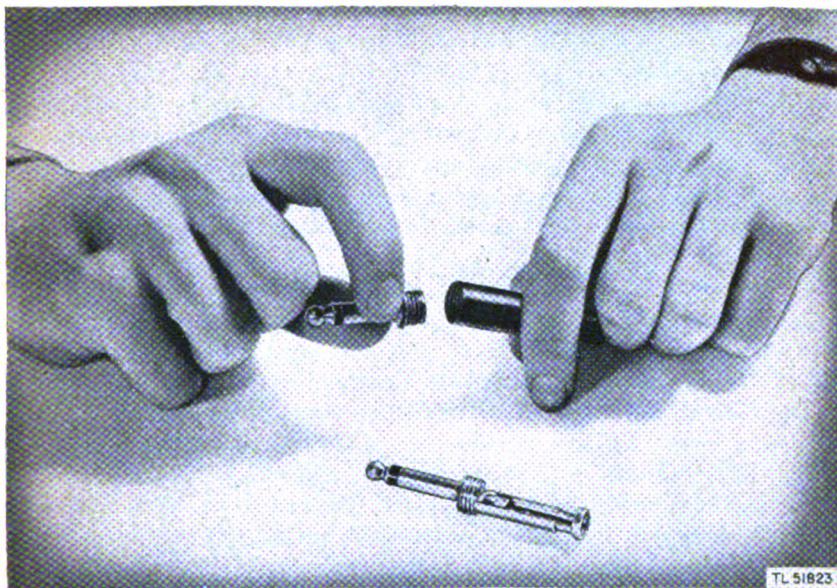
Installing Jig for Masking Threads of Plug Shell
